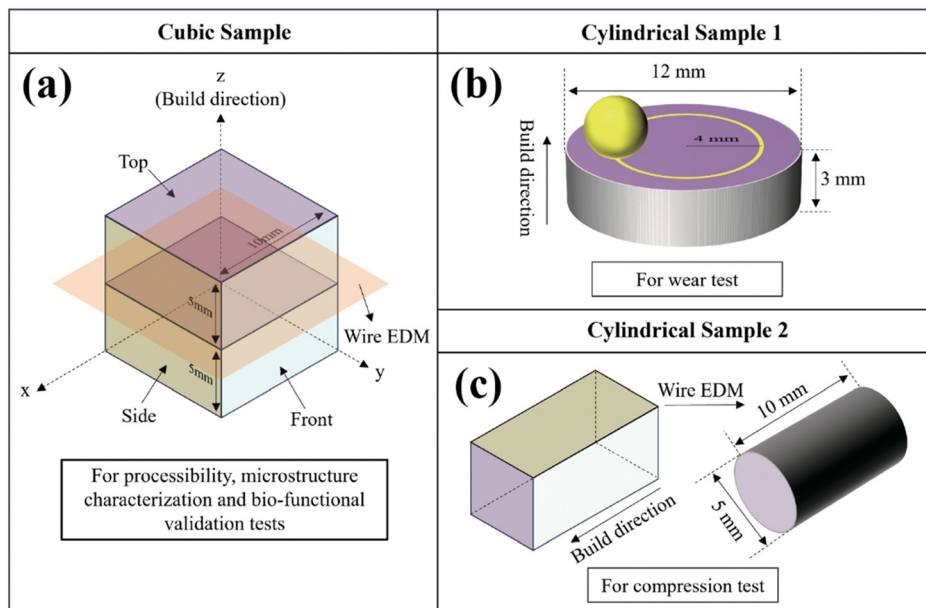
Schematic of the fabricated samples: (a) cubic sample used for several tests; the cubes were produced using wire electric discharge machining (EDM); (b) the cylindrical samples used for wear test; (c) the cylindrical samples used for the compression test according to the ASTM-E9-09 standard using EDM.
